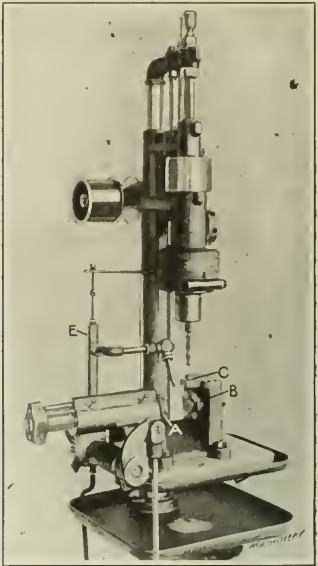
Detail showing Jig Construction for Wrench Holes in Graduated Time Train Ring
